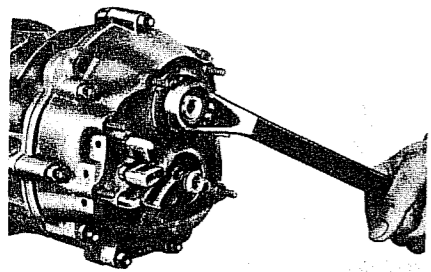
Removing the drive pinion nut on early type gearboxes. (On late type gearboxes the shaft is retained by a circlip).
